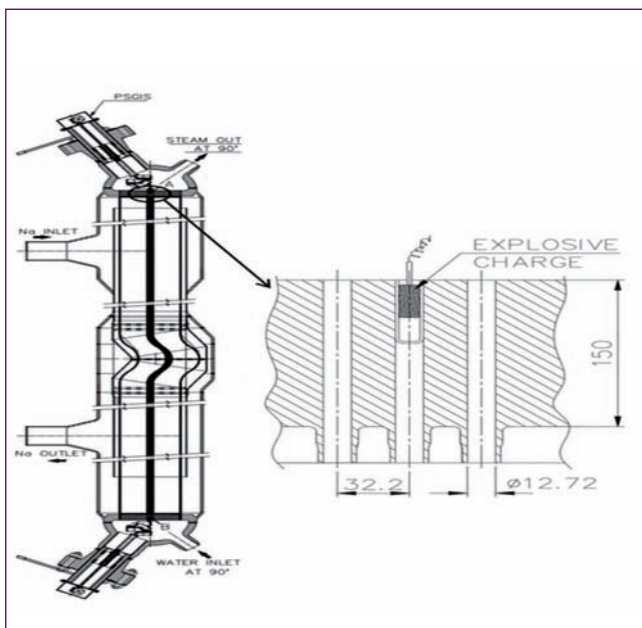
Schematic layout of explosive plugging of PFBR SG tube
